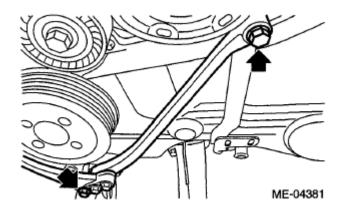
Locating Stopper Rod Courtesy of SUBARU OF AMERICA, INC.
